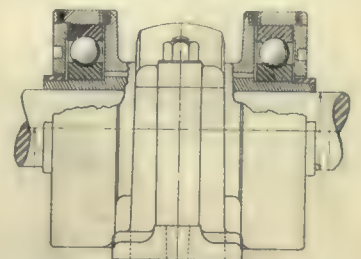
Double Annular Bearing in Ball and Socket Pillow Block.
